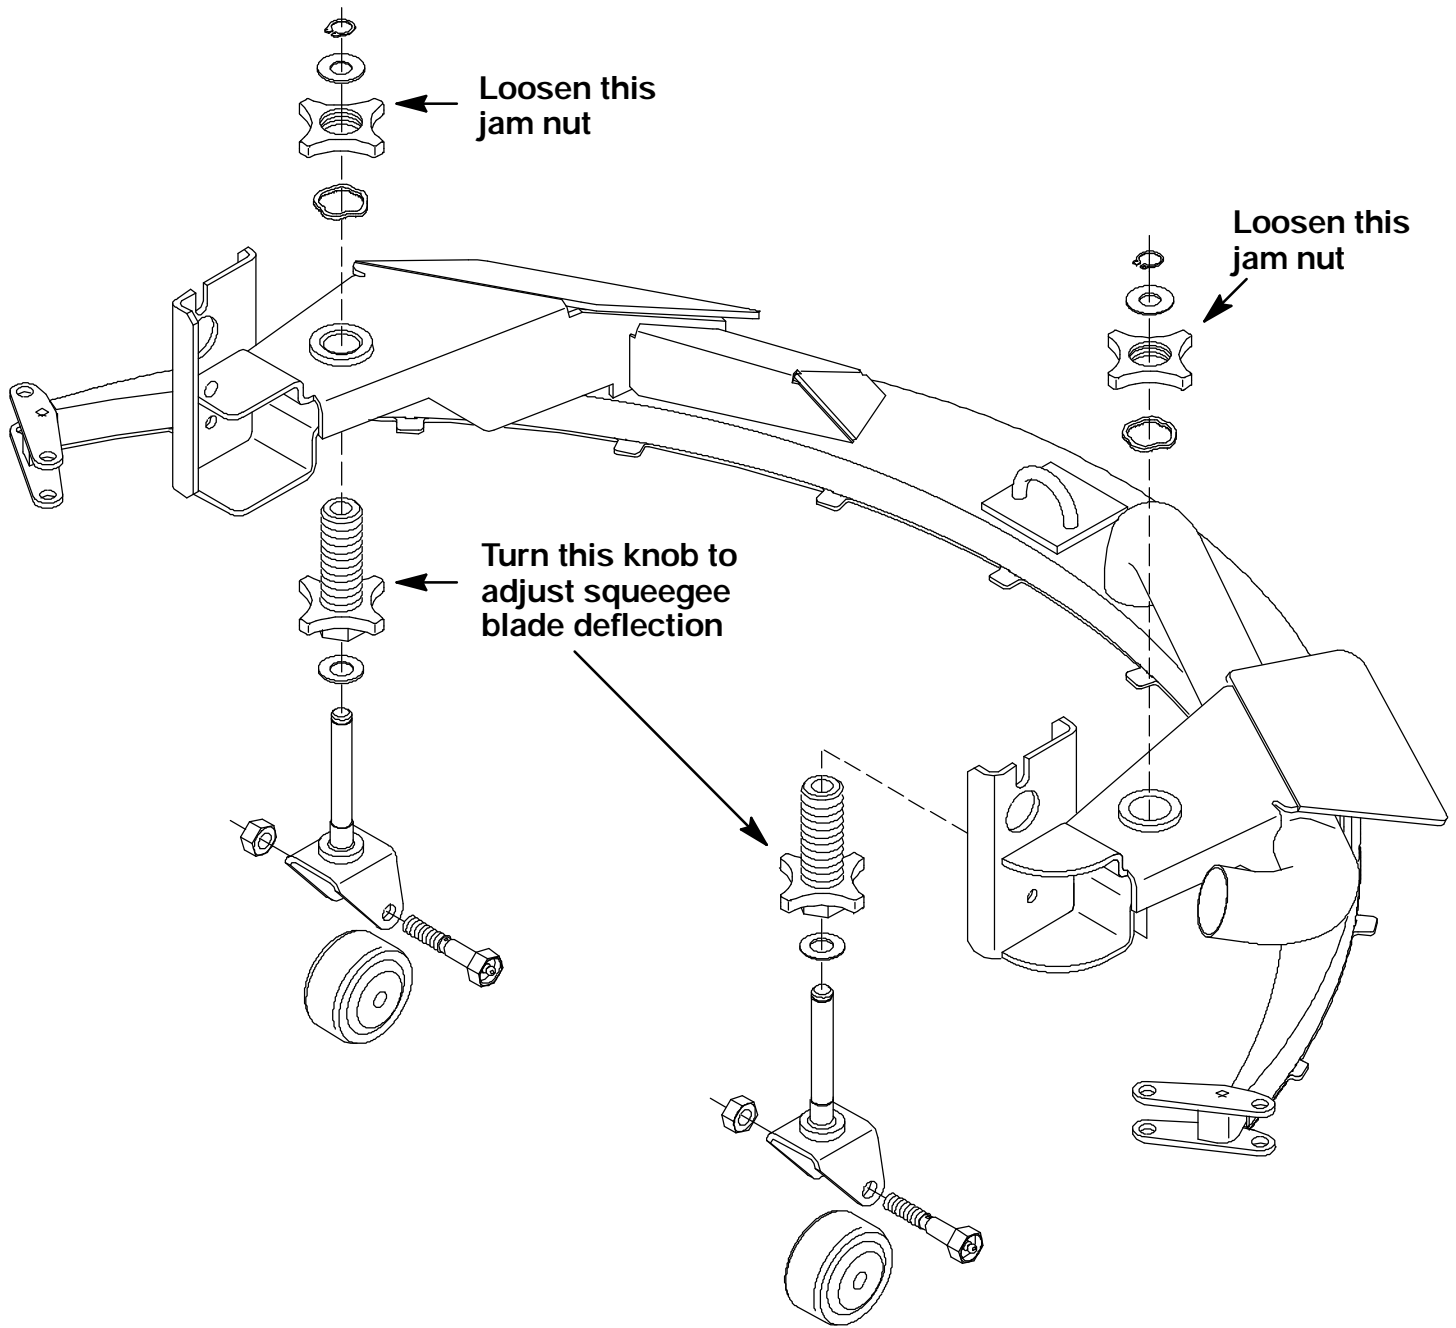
Squeegee Blade Deflection Adjustment Knobs
